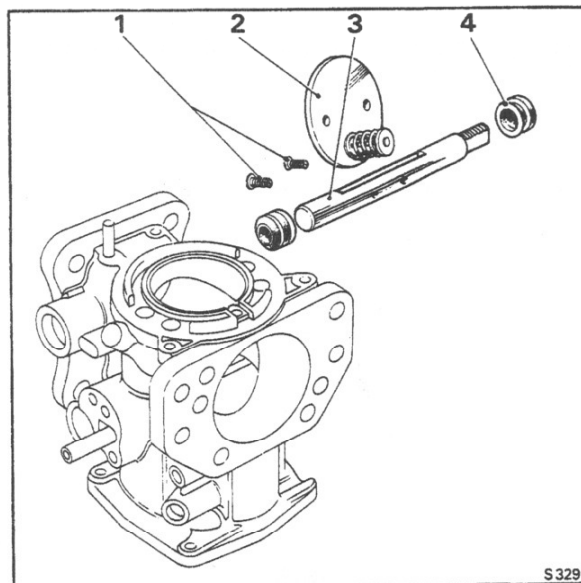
Dismantling a carburettor (throttle disc assembly)
